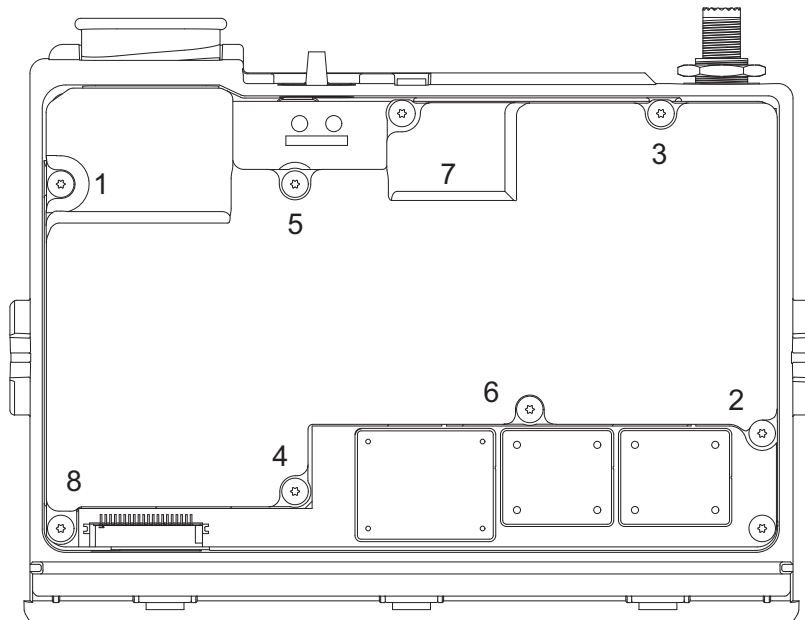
Screw Sequence to Tighten Die Cast Main Shield
